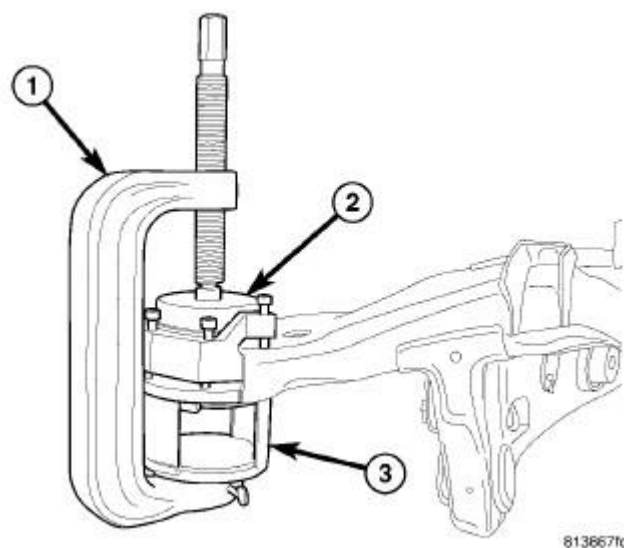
TOOLS POSITIONED TO REMOVE REAR BUSHING
